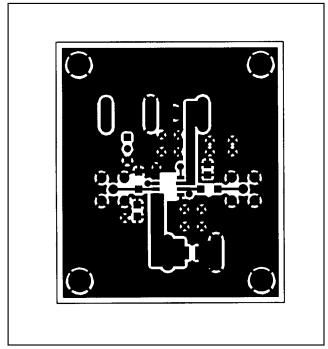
MAX4278 EV Kit PC Board Layout—Component Side
